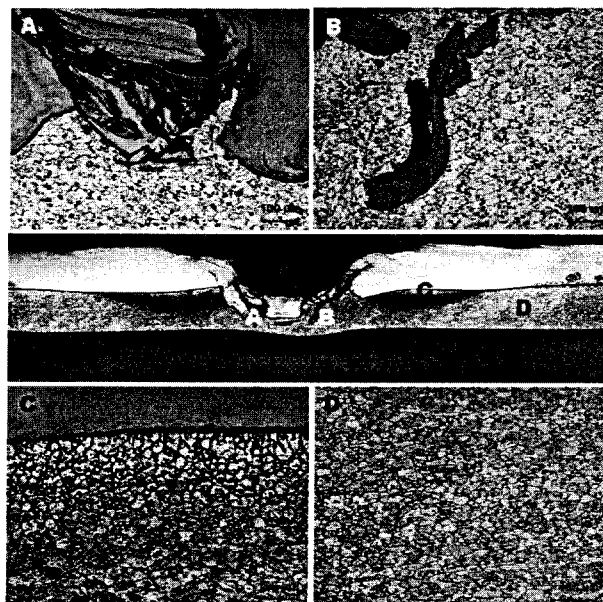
Macro and microstructure of dissimilar FSJ upper plate: galvanized steel, bottom plate: Al6061-T6,
